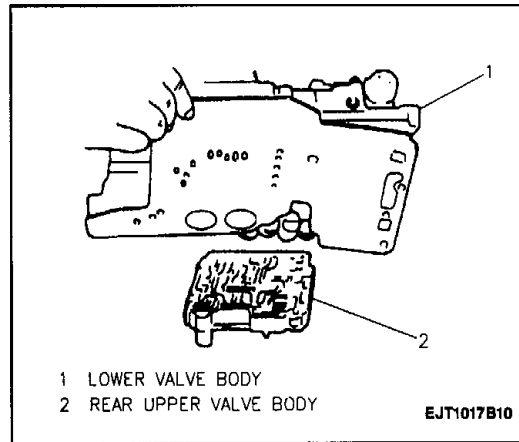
Removing Lower Valve from Upper Valve Body (03-72LE, 4-Speed)
